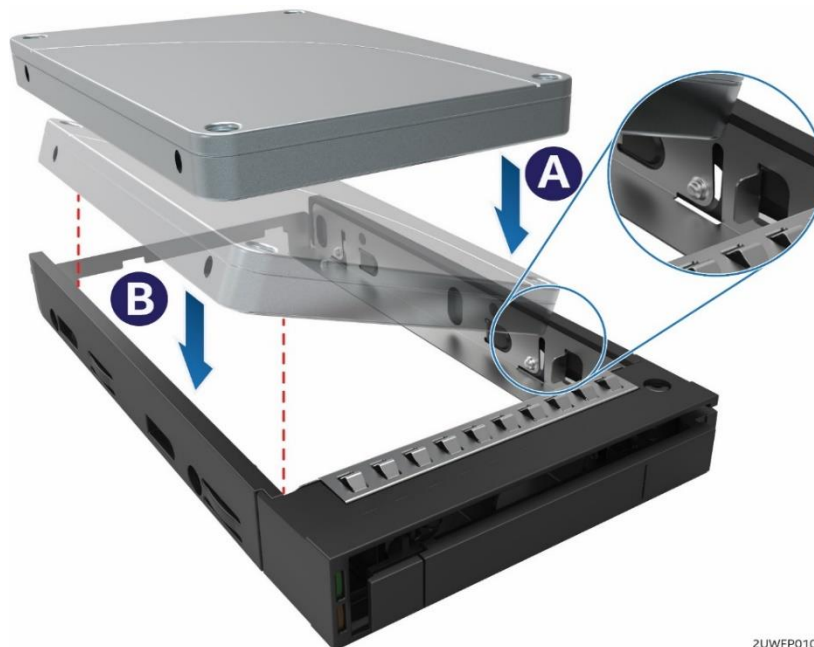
2.5" Drive Carrier Assembly – Drive / Drive Blank Removal
